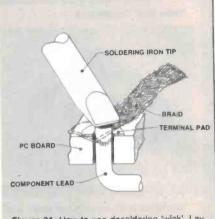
How to use desoldering 'wick'. Lay it over the joint and appaly the iron tip to the braid, using a little pressure. The solder will be drawn into the brald. When this happens, remove the iron and braid. Cut off the used braid.
